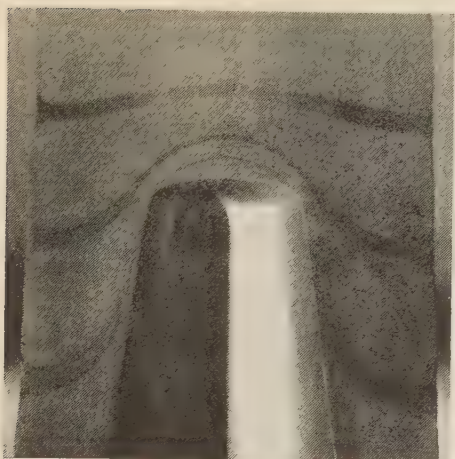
ENLARGED DETAIL OF CAVITY IN SPECIAL FORGING WITH PLUG INSERTS
